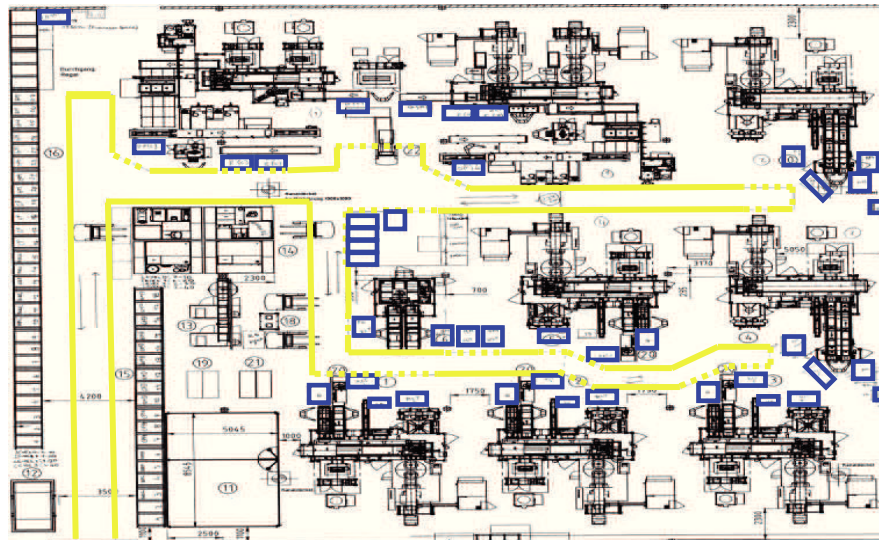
Layout of *Schenk Hall* with a floor marking system.
